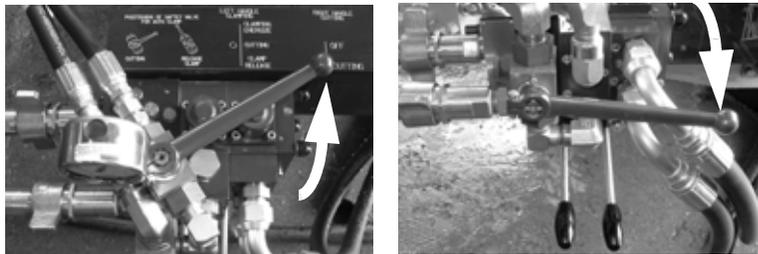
While holding down the clamping drive lever, close both clamping circuit valves to secure the clamp on the workpiece.
